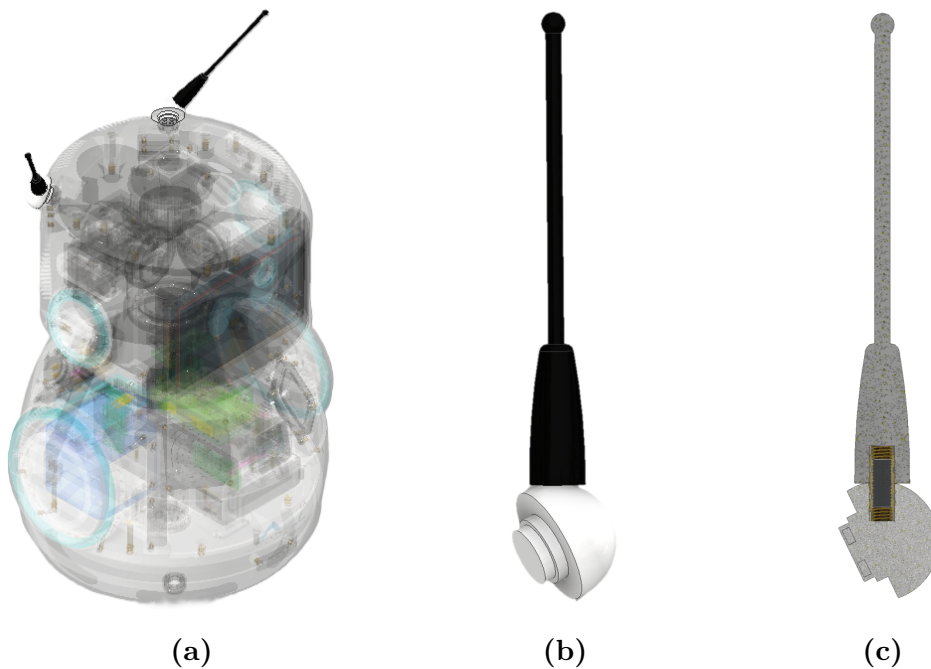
Robot antennas sub-assembly: (a) Location in the main assembly, (b) External detail view, (c) Internal detail view.
